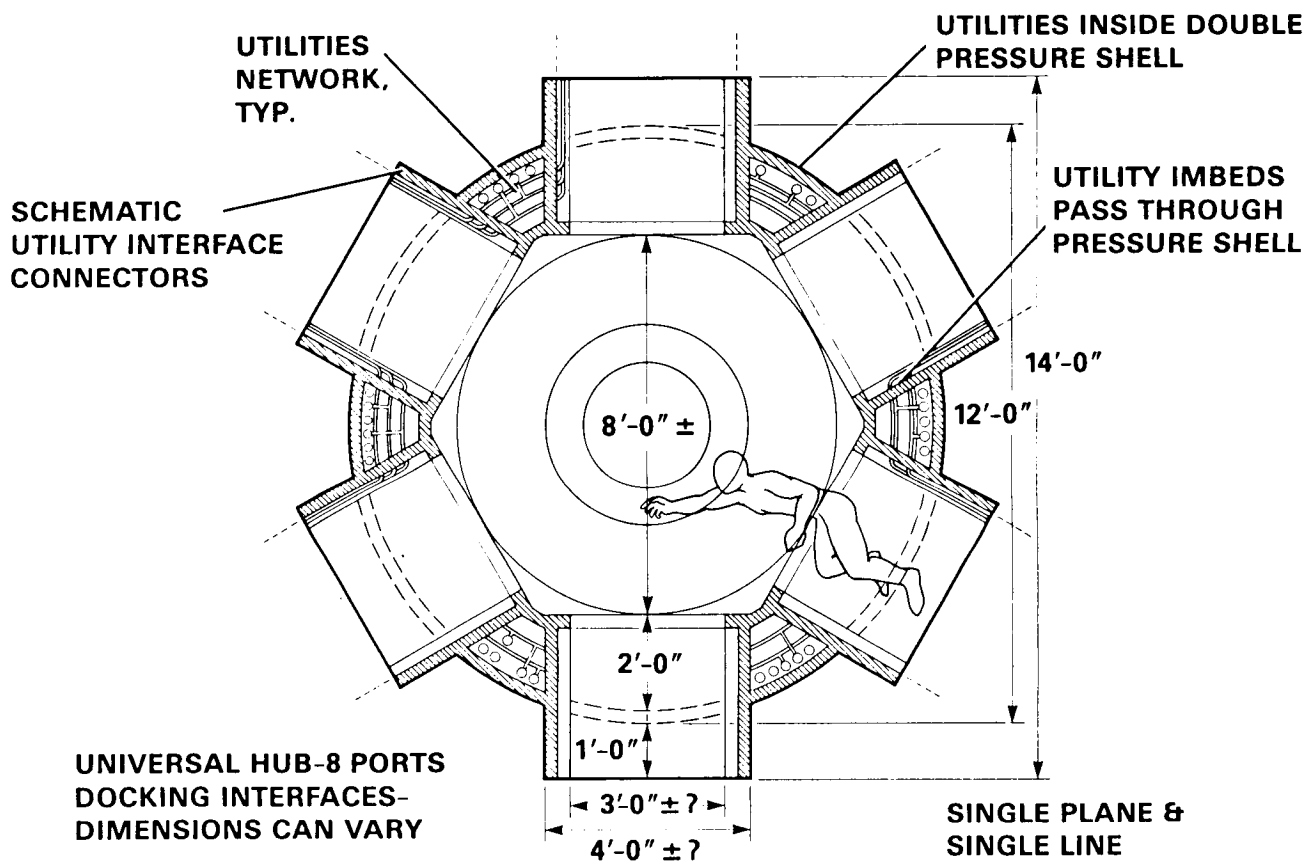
Cross section through Space Station berthing hub in plane of planar/triangular configuration.
